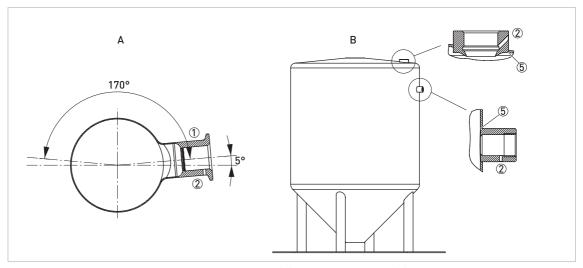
Mounting of 3A products in pipe installations (A) or tank installations (B)
